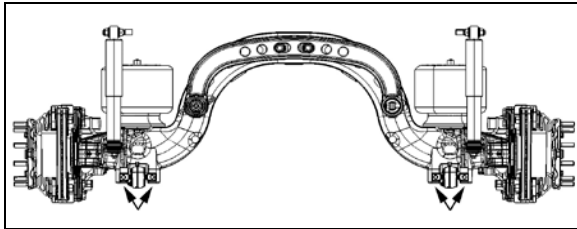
JACKING POINTS ON TAG AXLE 11029
